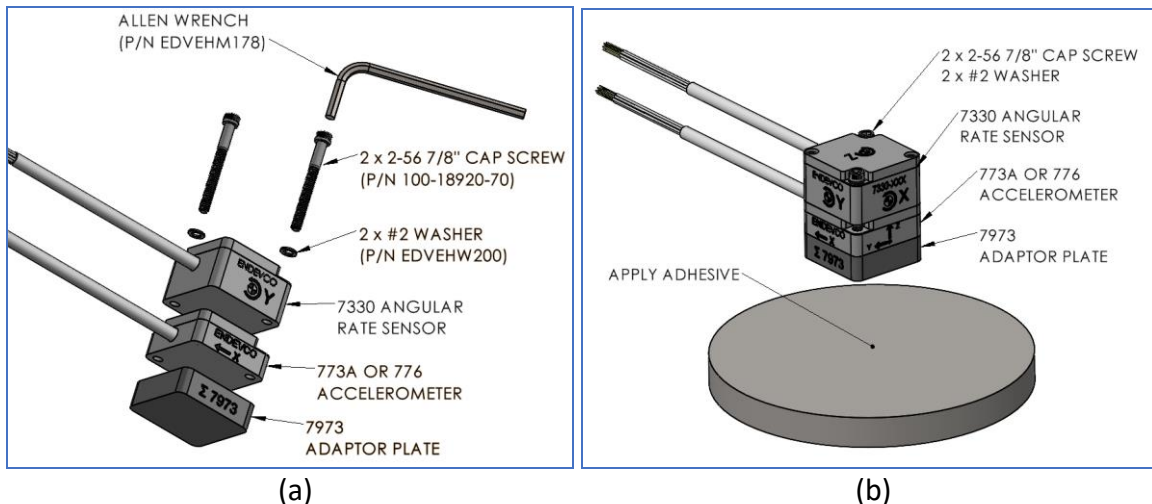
(a) Assembly of 7330+773A/776 6DoF module to adaptor plate 7973.
